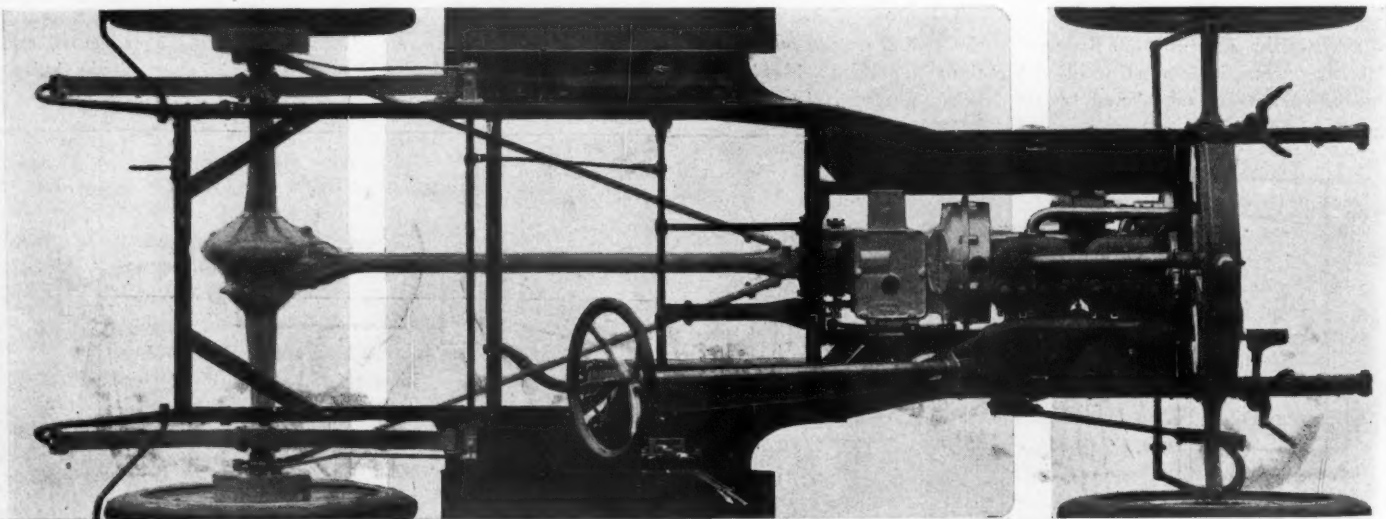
TOP VIEW OF HERRESHOFF CHASSIS SHOWING BOTTLE-NECK FRAME
